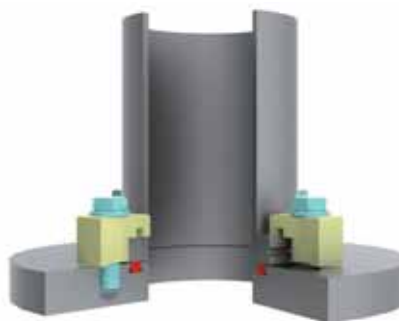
ISO-K flange mounted on base plate with O-ring nut and claw clamps for base plate with sealing groove
